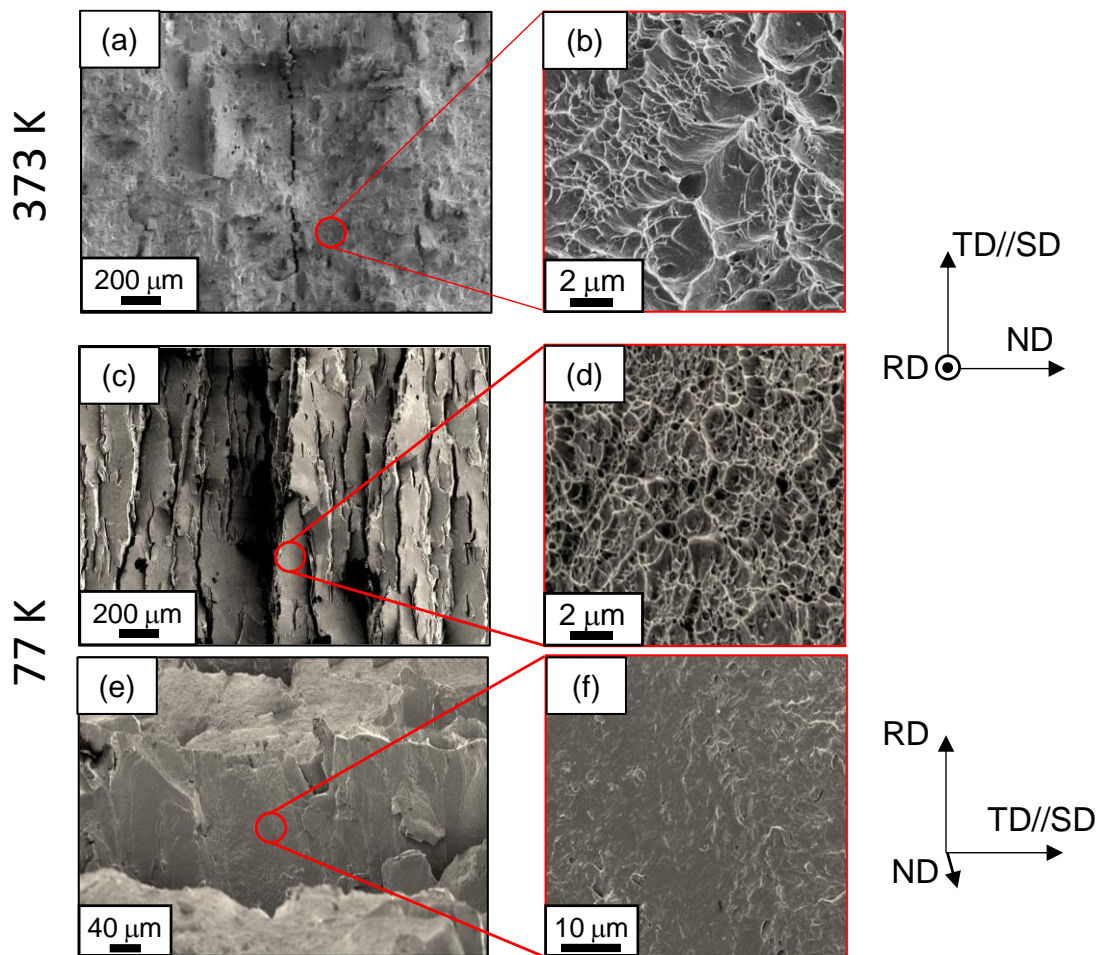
Fracture surfaces of 10AsQ: (a)(b) tested at 373 K ((a) low magnification, (b) enlarged view of (a), respectively), and (c)–(e) 77 K ((c) low magnification, (d) enlarged view of (c)).
